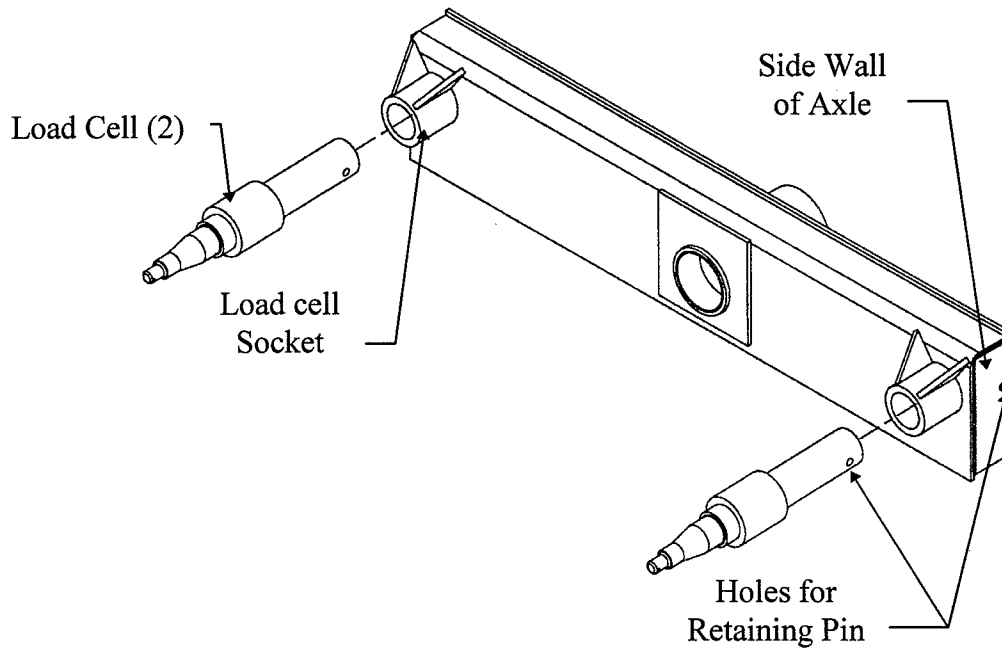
Isometric view of modified tandem beam axle assembly.
